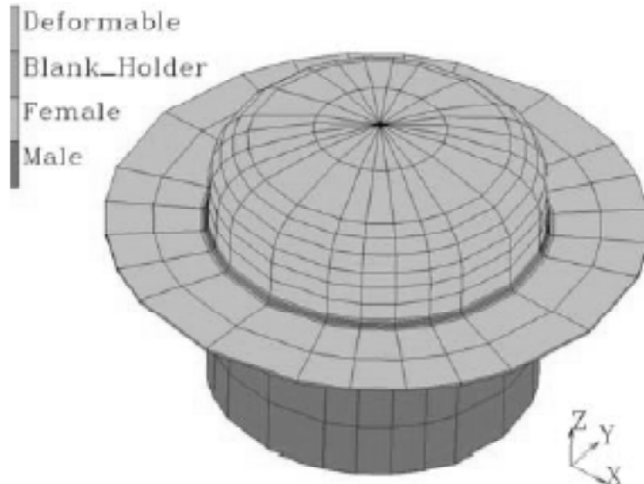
Parts of Rigid and Deformable Bodies in the Finite Element Model
